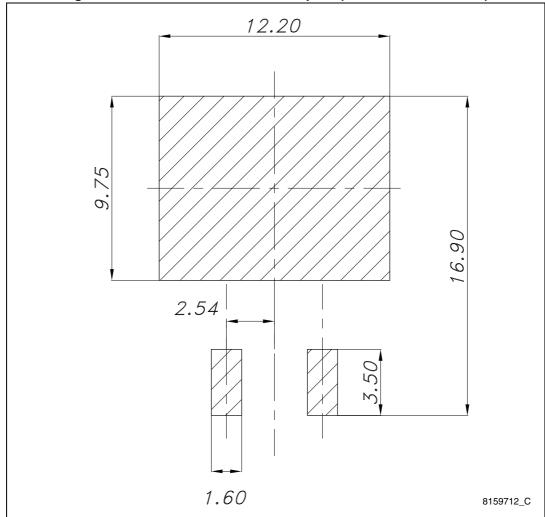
H²PAK-2 recommended footprint (dimensions are in mm)
